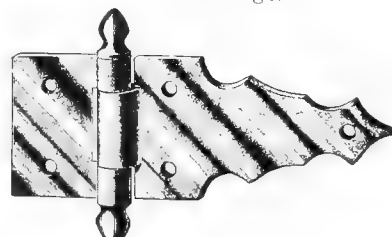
Refrigerator Door Hinge. D. M. Co.
